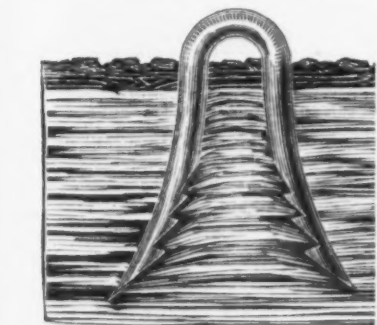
Sectional View of Staple Driven into a Piece of Wood, Showing the Tendency to Spread.
